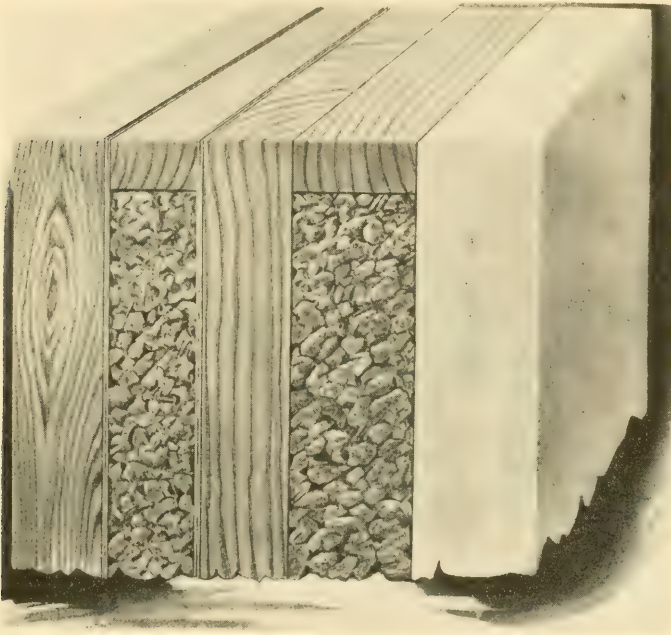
JEWETT REFRIGERATOR WALL SECTION.
